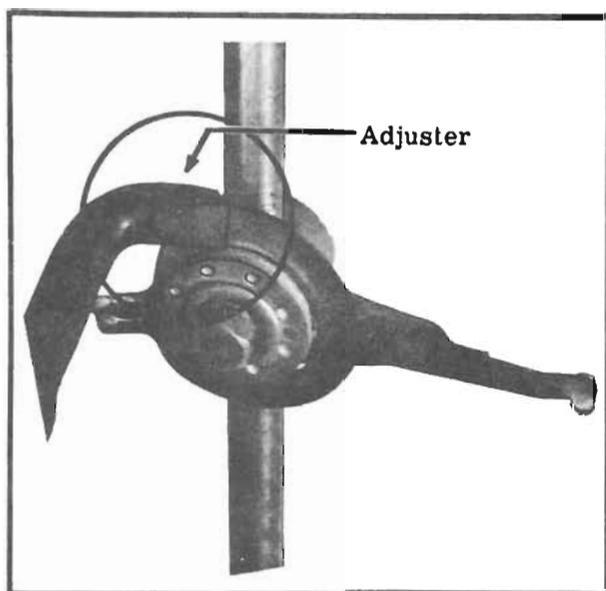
Spring Adjuster is Being Used to Adjust Tension of Vertical Wiper Spring.
